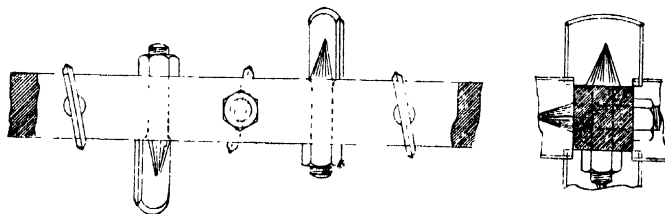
Paddle-blade Conveyor (Short Cutters).
